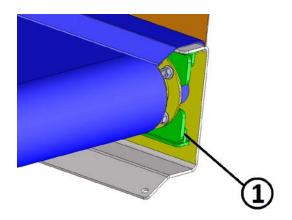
Idler End Positioning (view from end of roller towards skid shoe)
